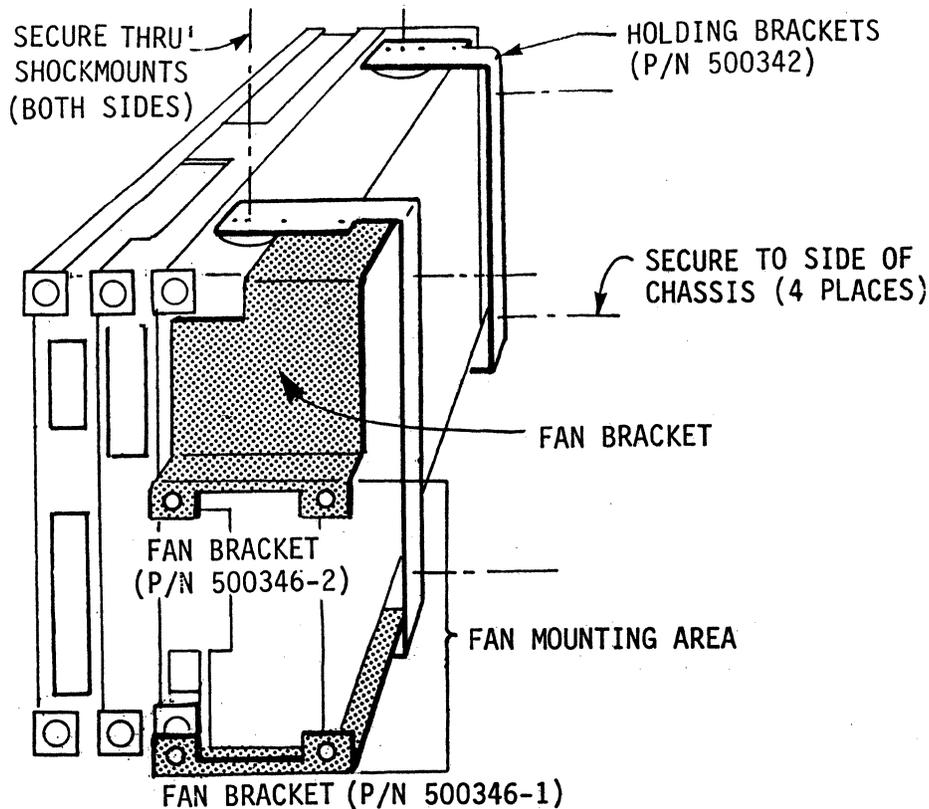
8" WINCHESTER MOUNTING BRACKETS
